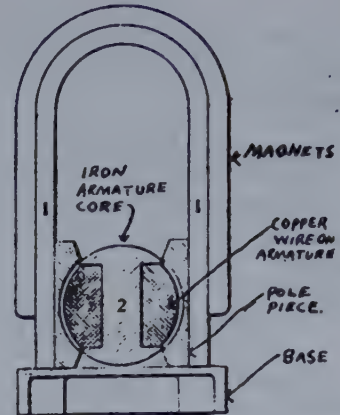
View of a Low Tension Magneto with the end plate off and armature shown in section.
